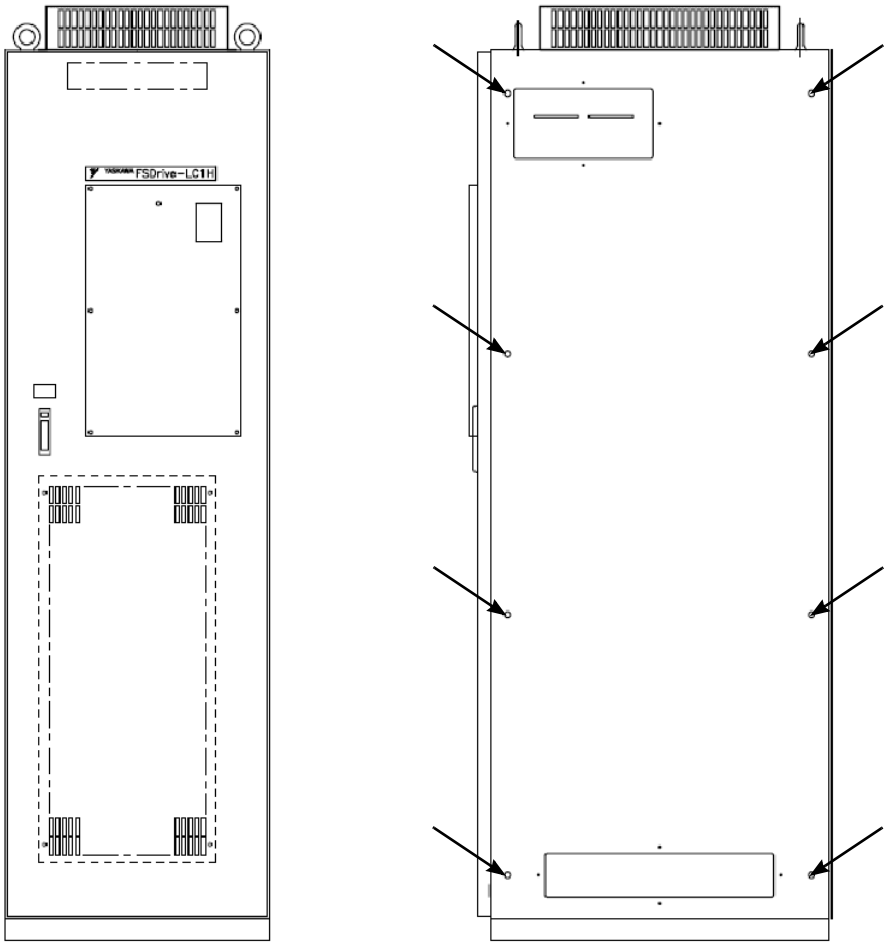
Mounting Holes for Side-by-Side Installation Drawing
